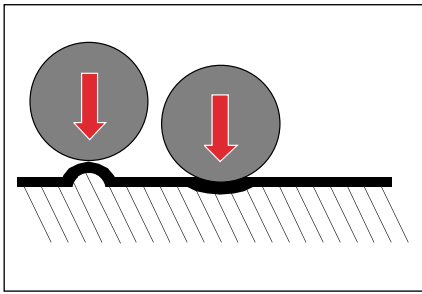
Schematic: polishing by burnishing. Steel balls hammer surface flat
